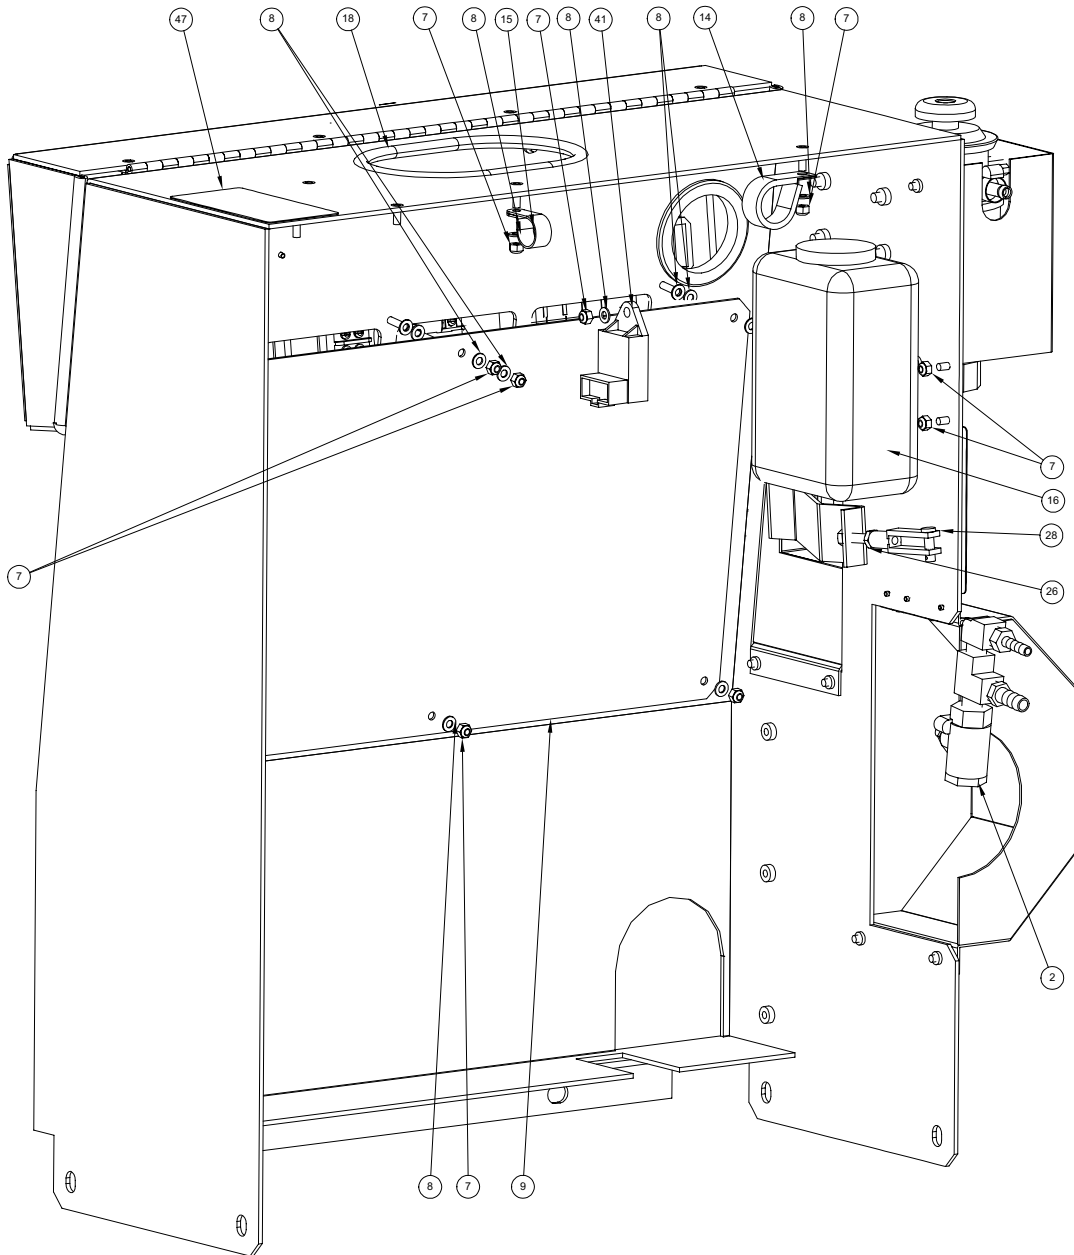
Dash Assembly CTS 450 Diesel - Rear View
